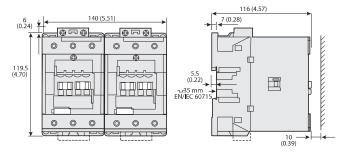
100-E80 4-Pole Contactors with Front-mounted Auxiliary Contact
